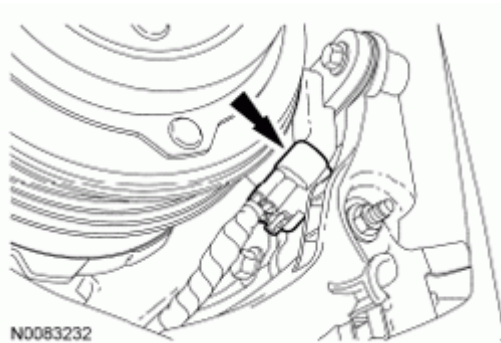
Locating A/C Compressor Electrical Connector
